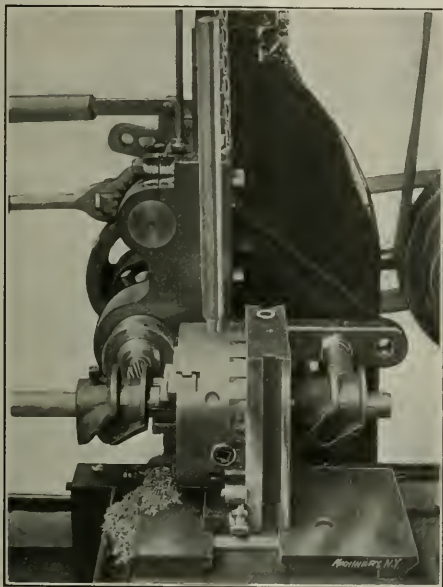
Cam Cutting with Master Cam and Follower Roll.
